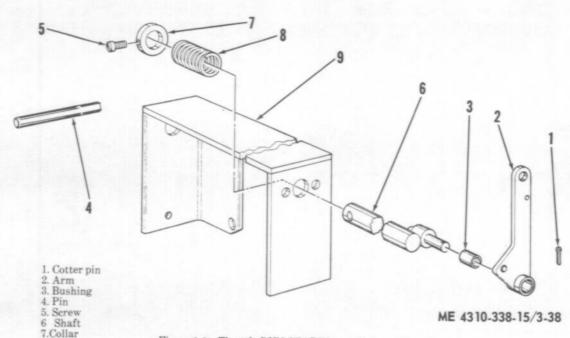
Throttle RUN-START lever; disassembly and reassembly.
